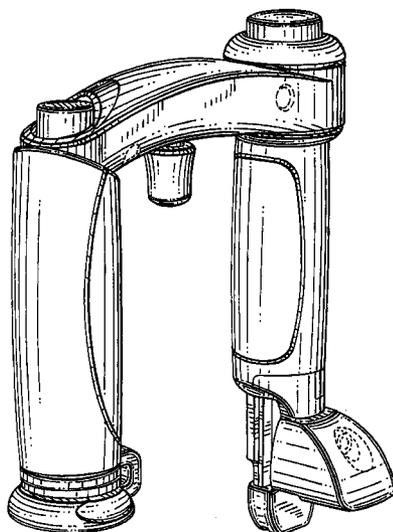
is a front perspective view of an ornamental design for a cutting device, particularly for cutting out glazing panels, according to the invention, shown with the cutting blade;
